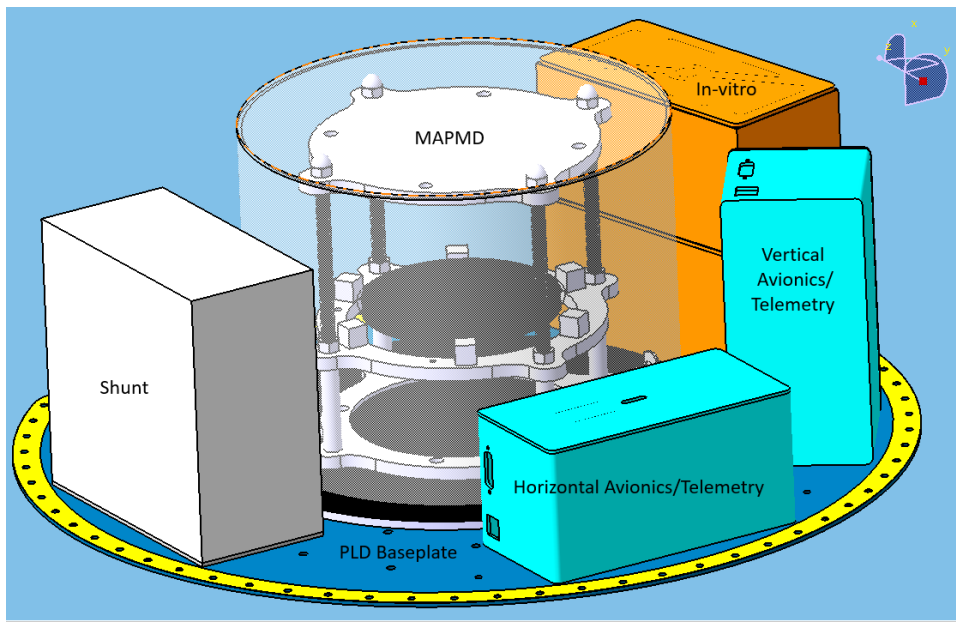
Updated CAD model of the PLD ERAU payload assembly
